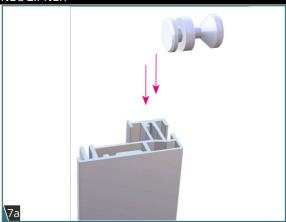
In case of insufficient space, extend pin from the mounting bracket and slide it into the guide.
